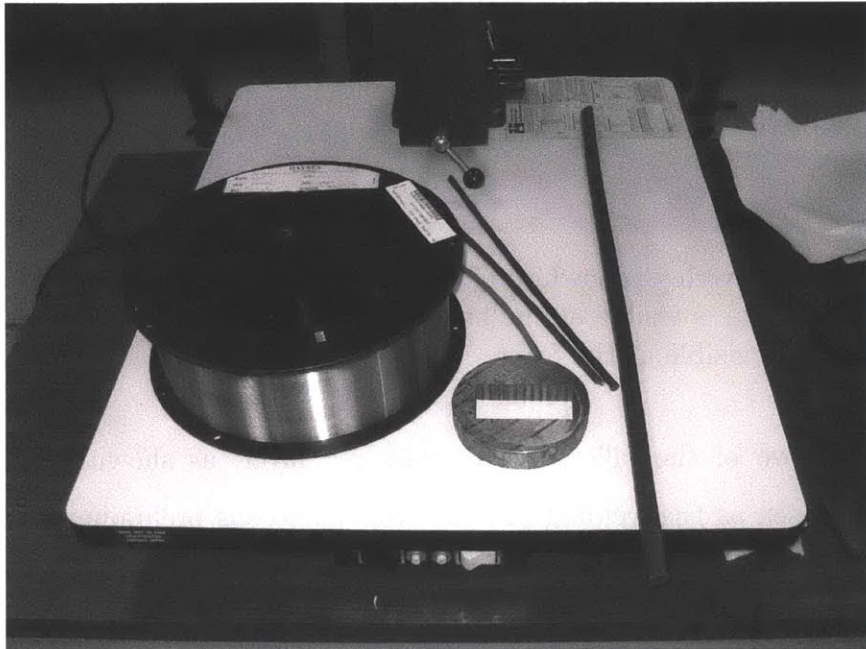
Photographs of weld wire in various stages of production. First a forging billet was made, a slice of which is visible at the front of the figure. It was then drawn in a bar-and-wire mill to 12.7 cm (1/2") OD rod (on the right), and then to 6.35 mm (1/4") OD wire rod (at the back). Finally, it was wire drawn to 0.89 mm (0.035") solid core MIG weld wire (at the front-left).
